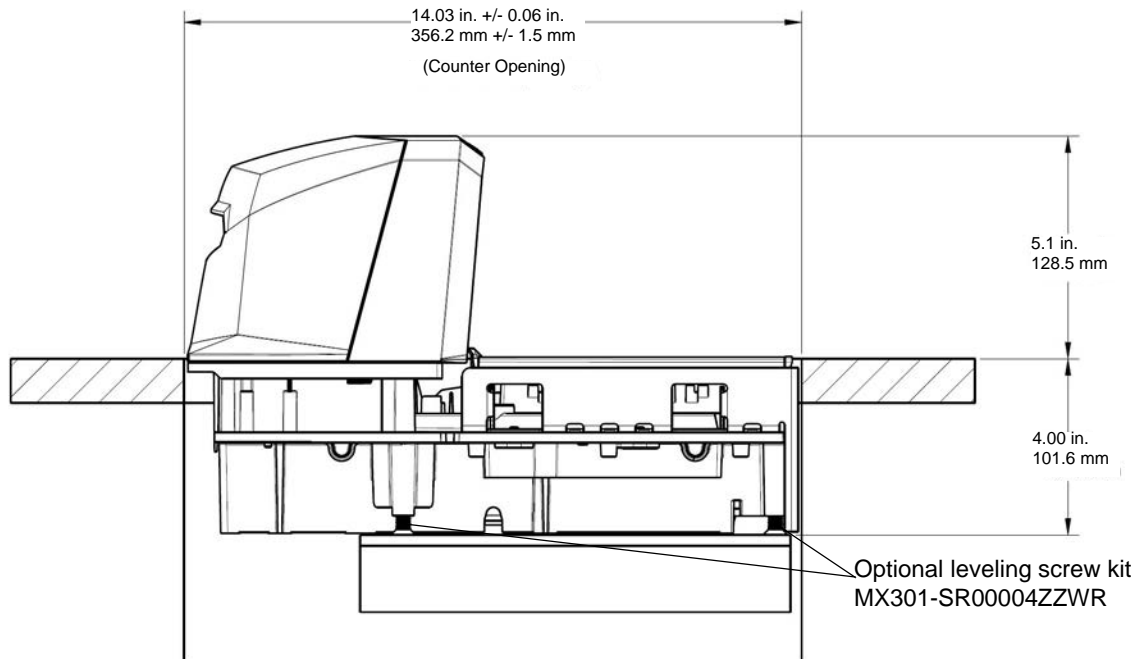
MP6000 - Short Unit (No Scale) Side View Dimensions
